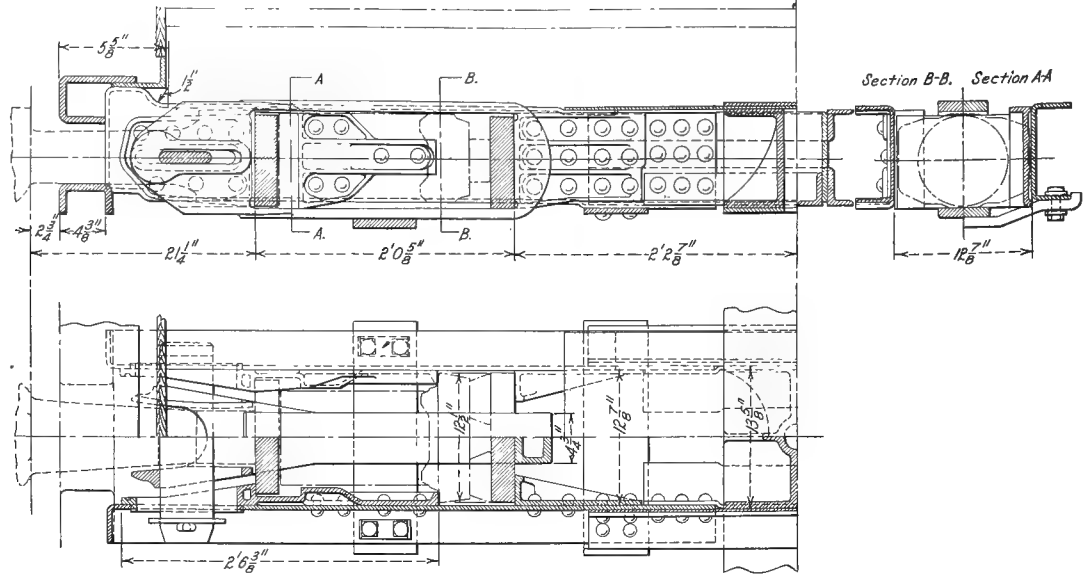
Universal Attachments and Yoke for Sessions Draft Gear, Type K. Universal Draft Gear Attachment Company.
